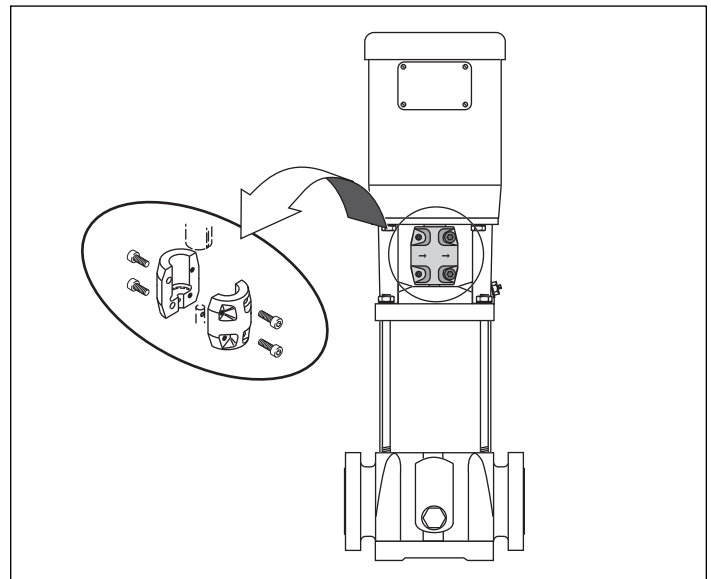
Remove the Socket Head Screws and the Coupling Halves
